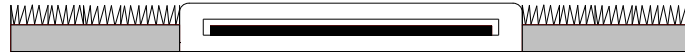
Sealed track assembly showing best practice techniques for protecting the photoluminescent strips/coatings.
